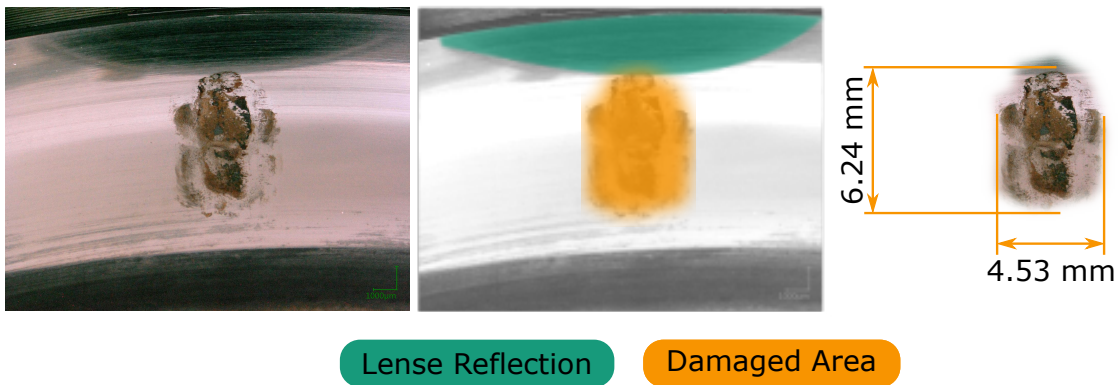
Exemplary raceway condition inner ring, Test ID 9, Bearing ID 0013
